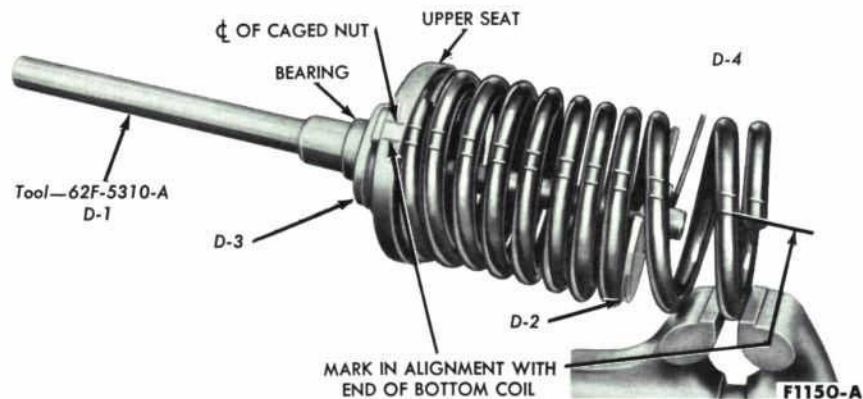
Removal or Installation Tool and Upper Seat on Bench
